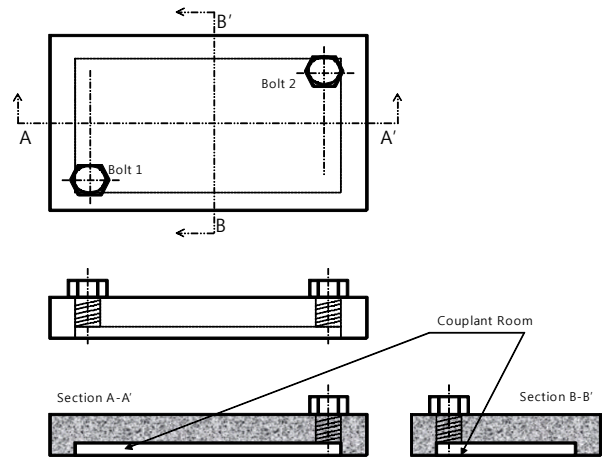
New-Type Reinforcement Plate with Couplant Room
